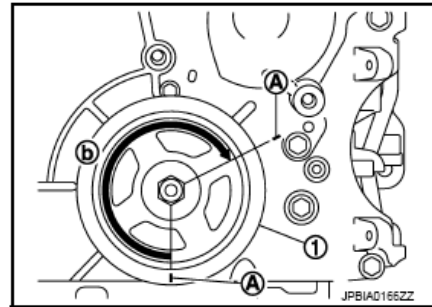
Rotating Crankshaft 240 Degrees Clockwise
